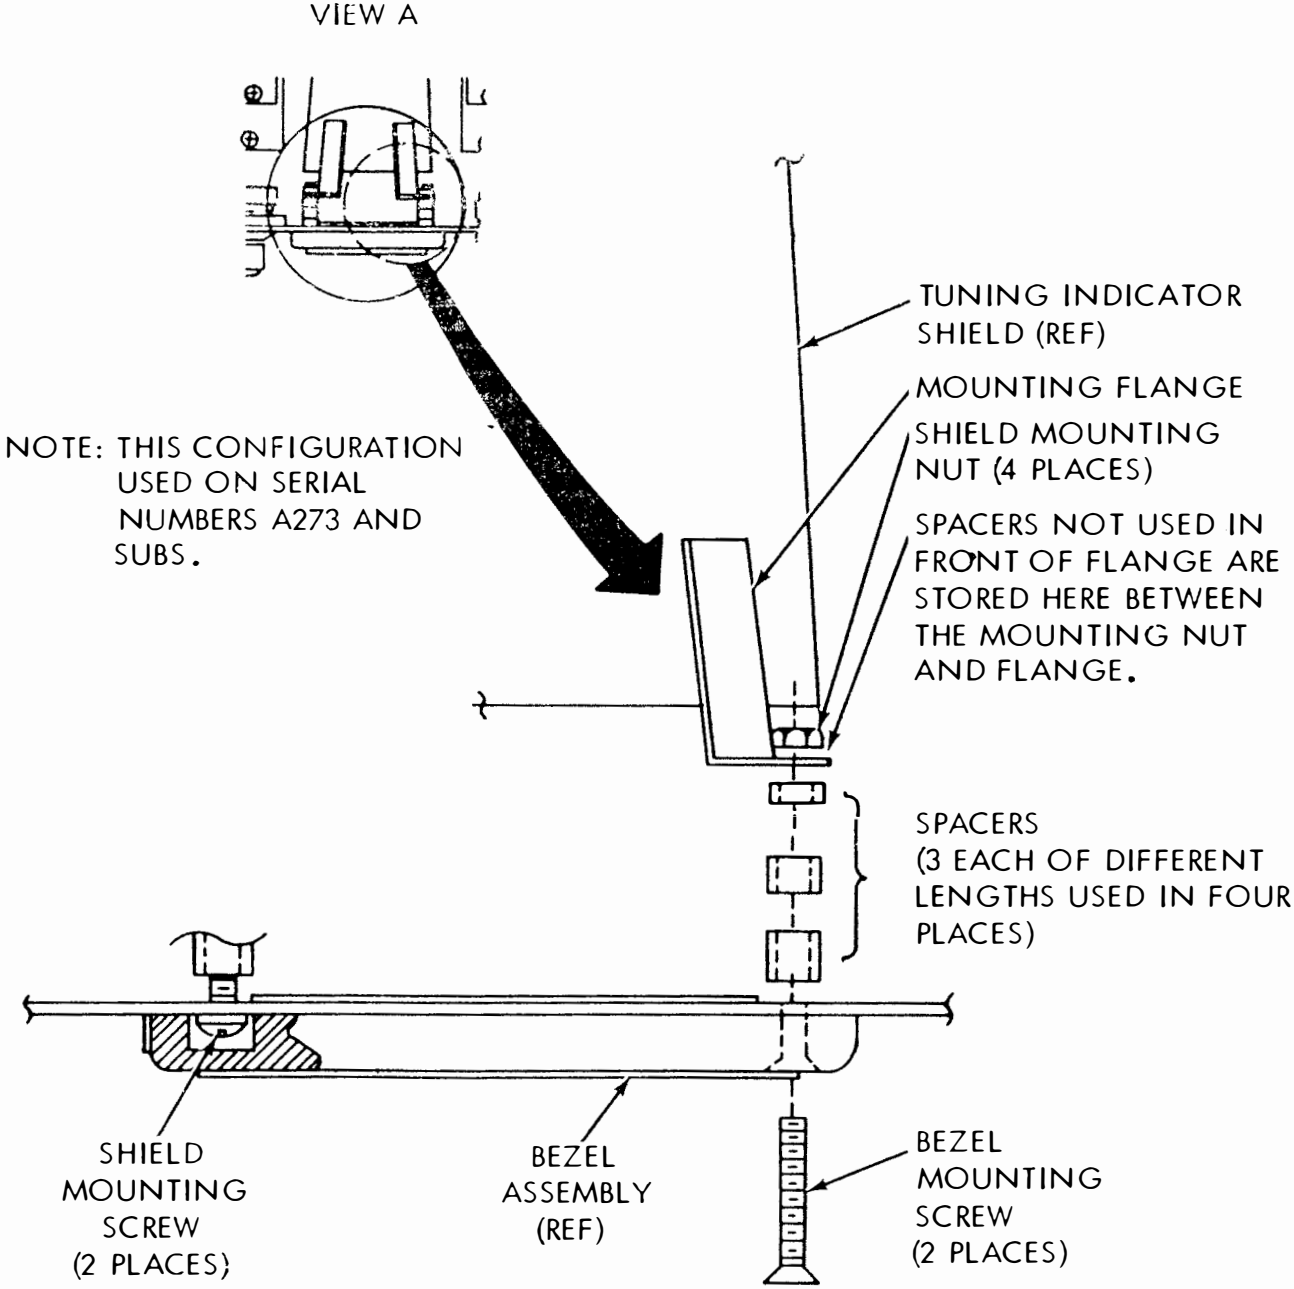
Converter parts location. (Sheet 1 of 2)
